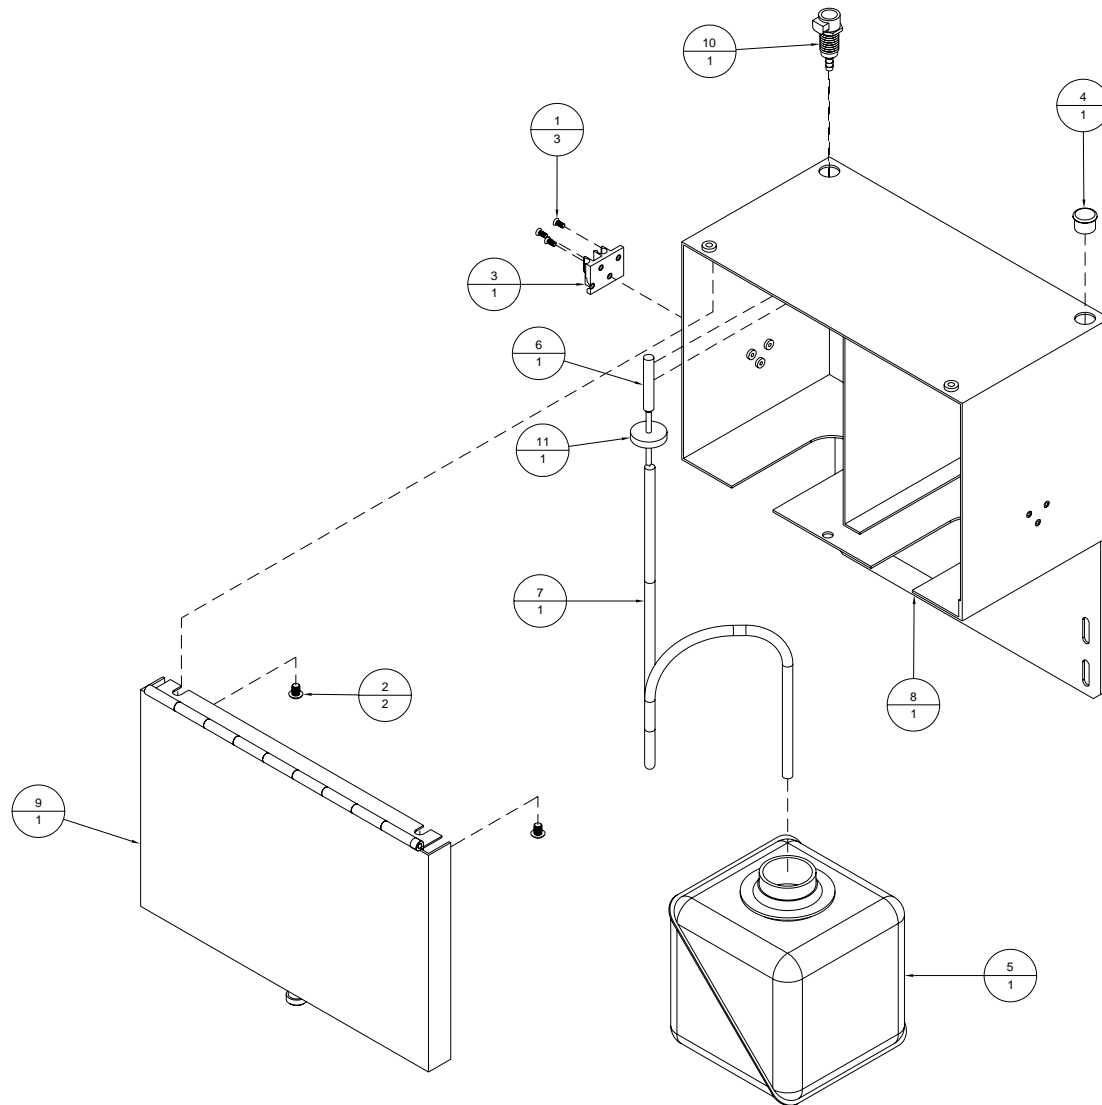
Ink Bladder Holder Assembly (9102156A)
